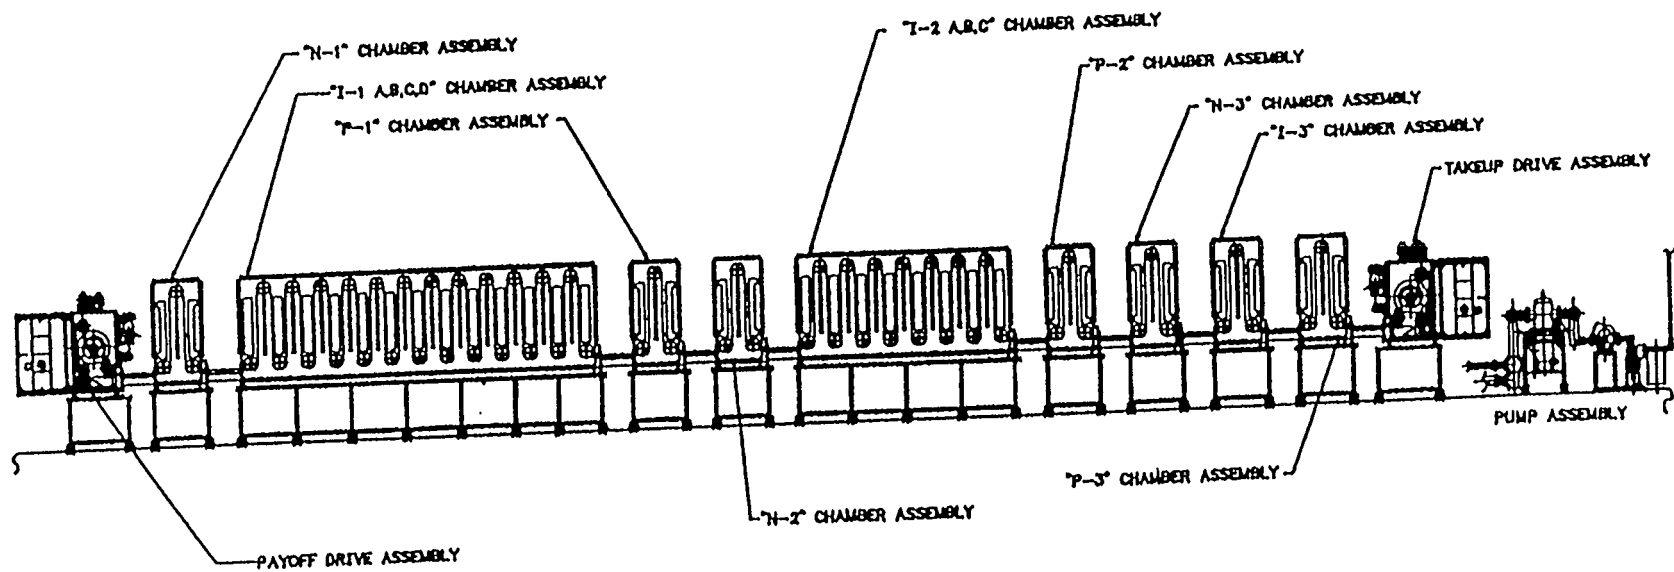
Serpentine web continuous roll-to-roll concept design for triple-junction a-Si cell deposition machine.
